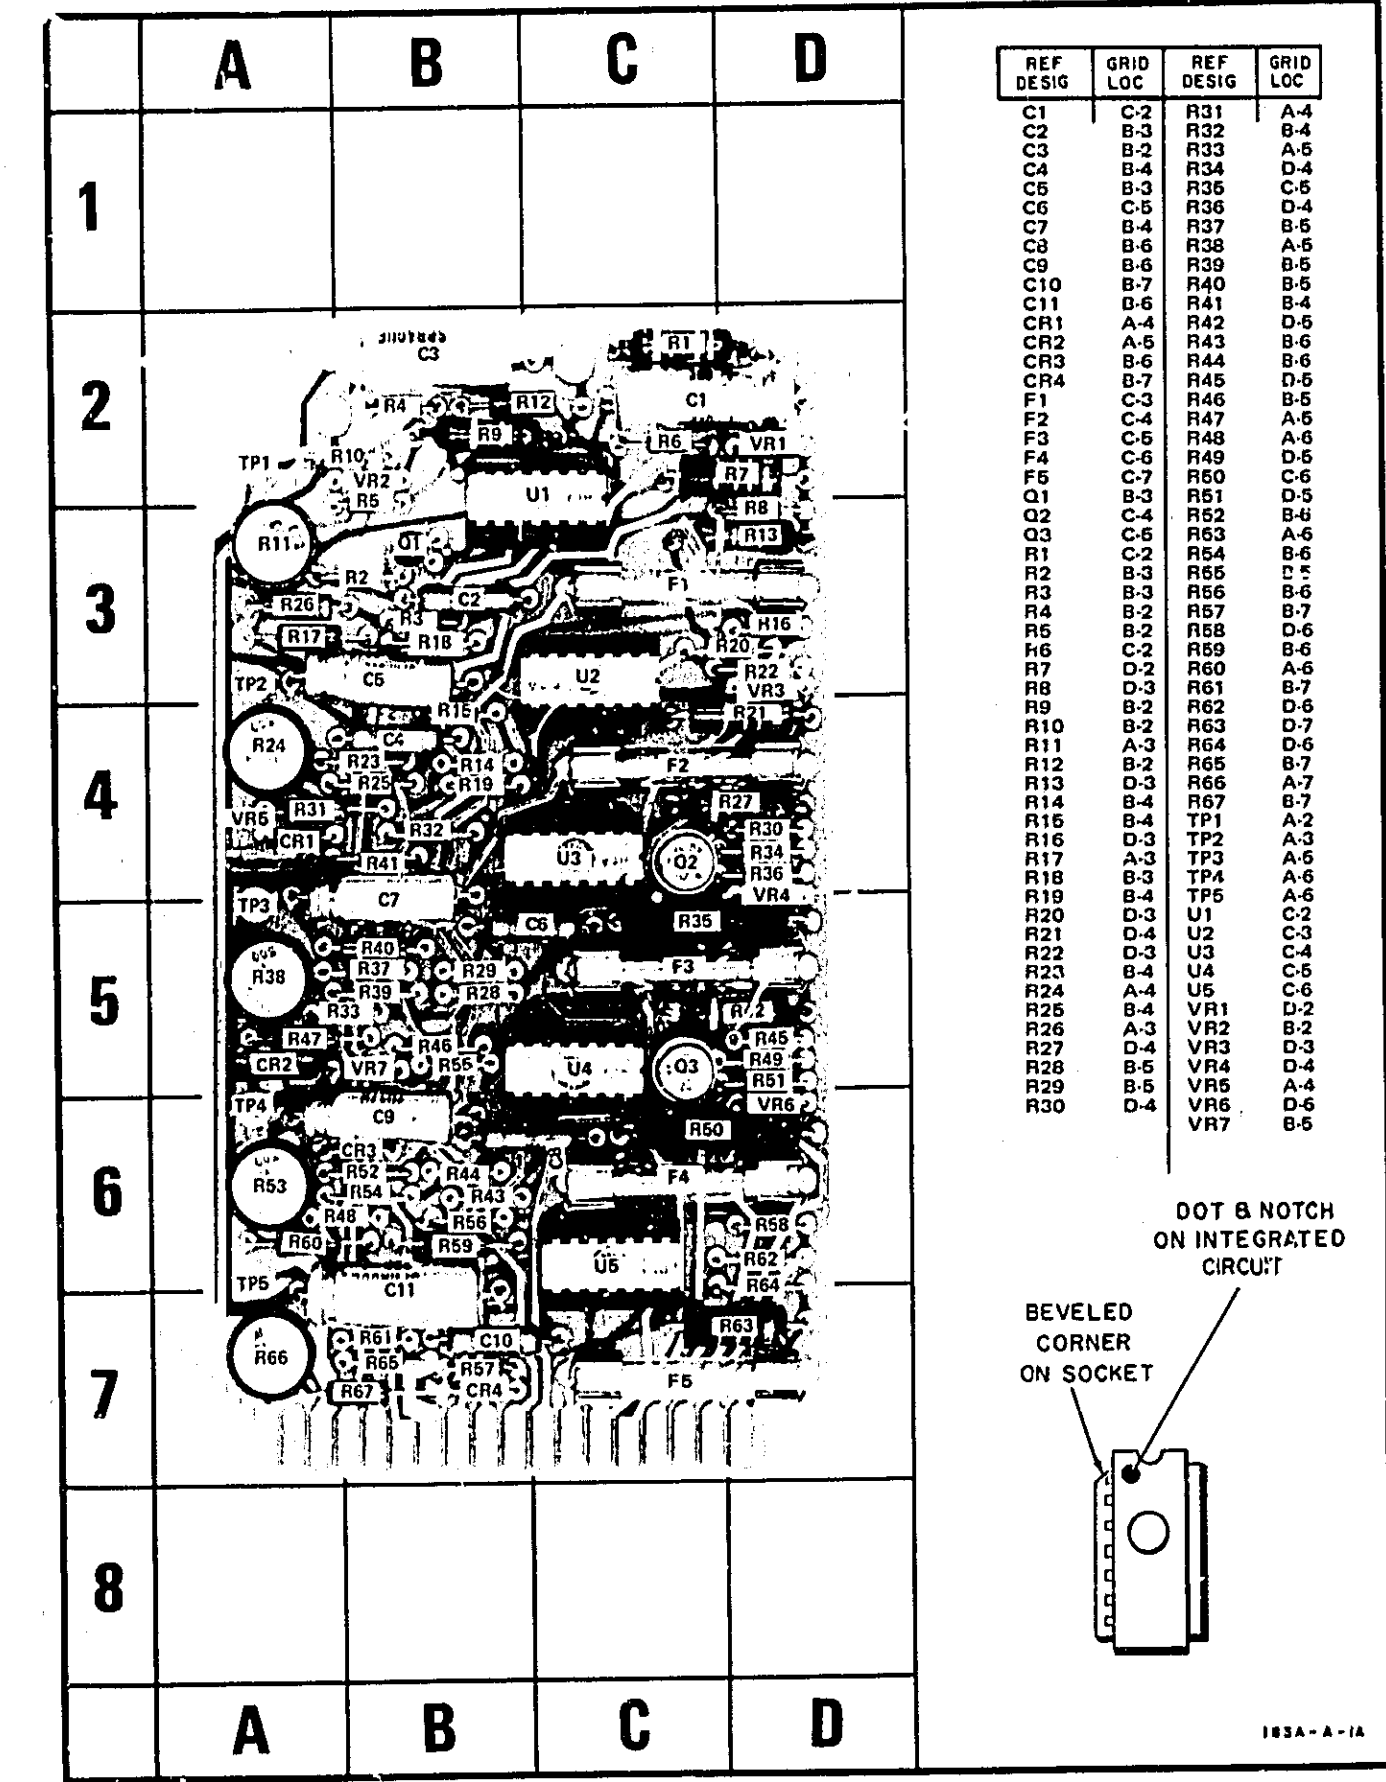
Component Locations, LVPS Regulator Board A1A1
